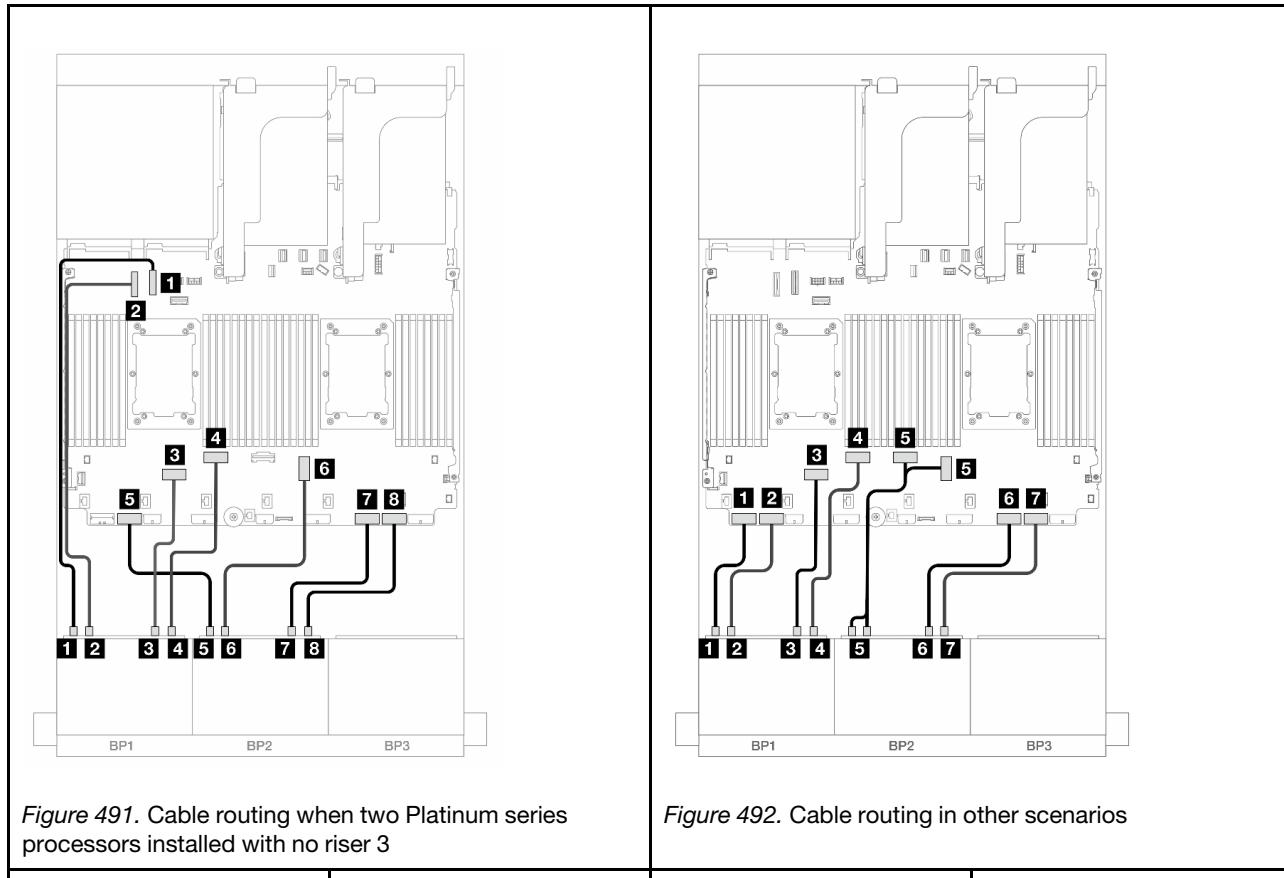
Cable routing when two Platinum series processors installed with no riser 3
